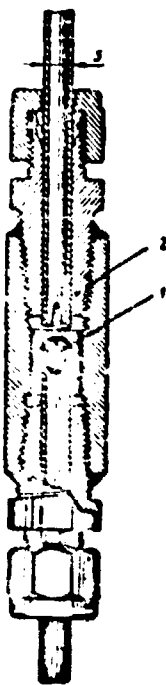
Ball feed valve for a sodium pipeline, $d_p = 3$ mm.
